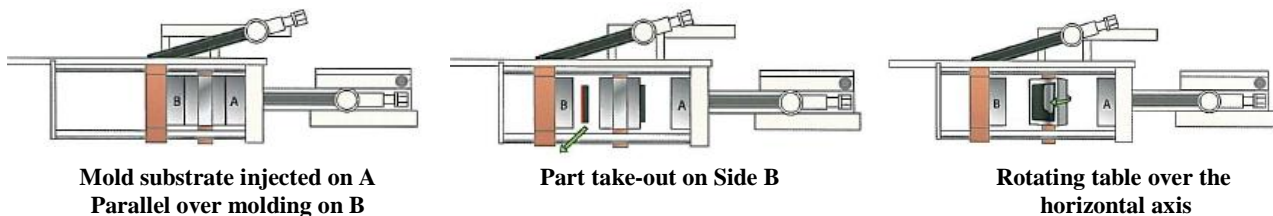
Schematic of Quadloc Tandem Injection Molding Machine⁴
